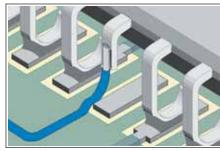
Acceptable* Wire soldered to clipped component lead. +
